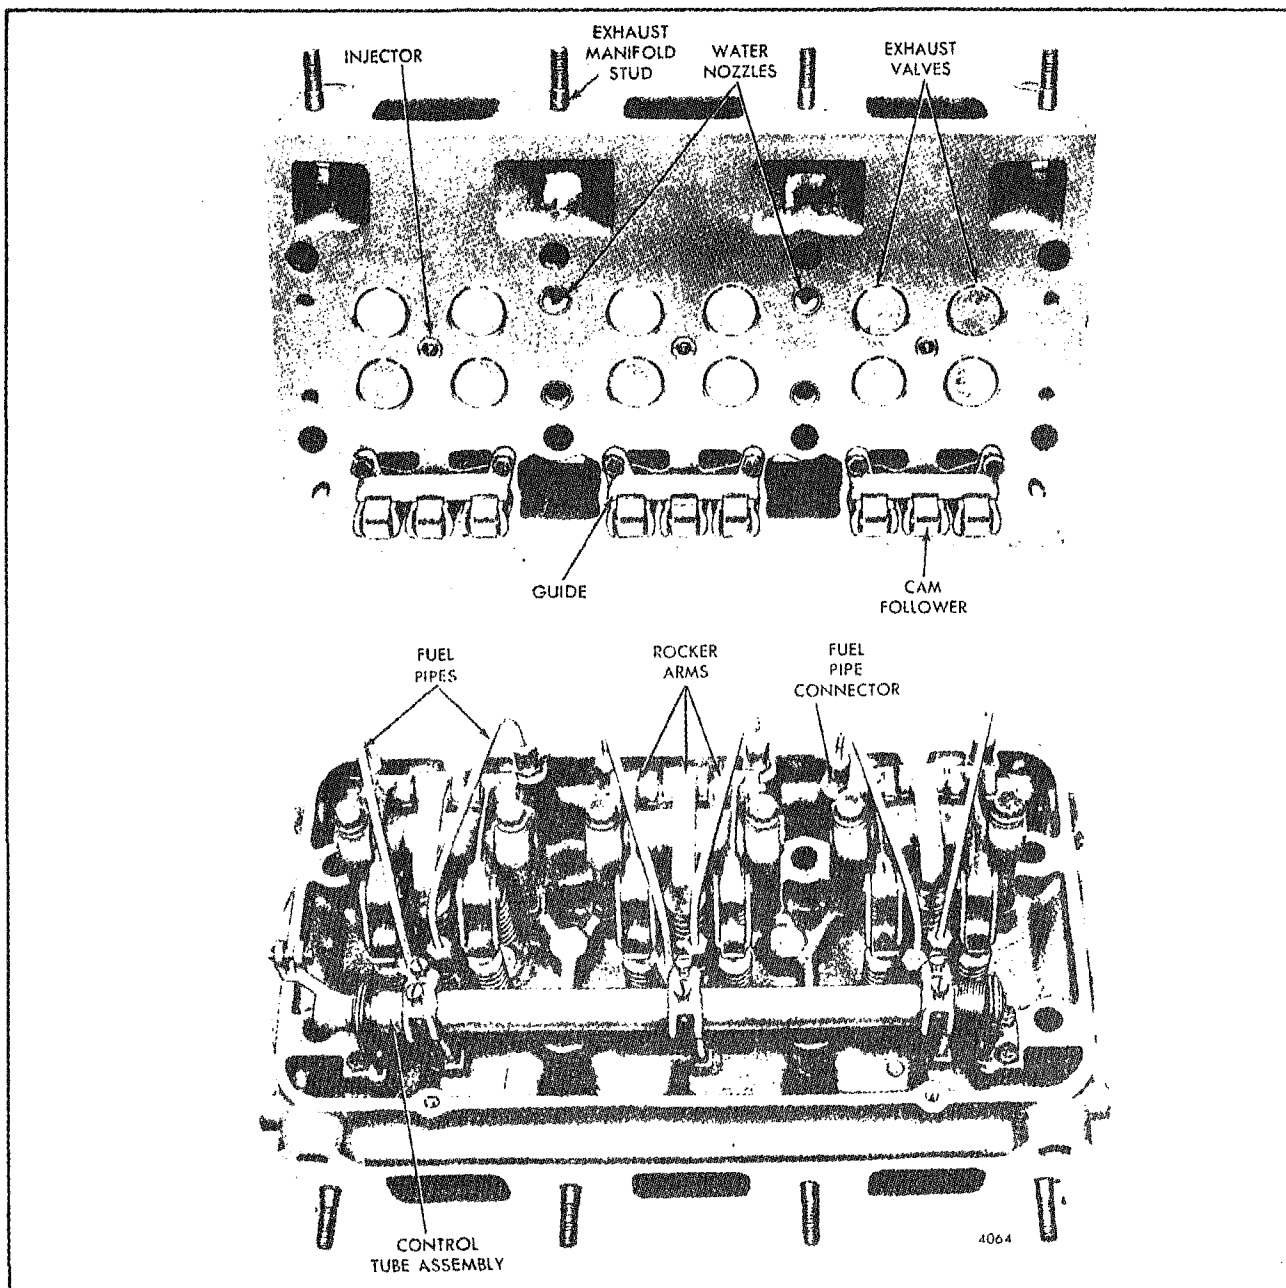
Typical Four-Valve Cylinder Head Assembly
